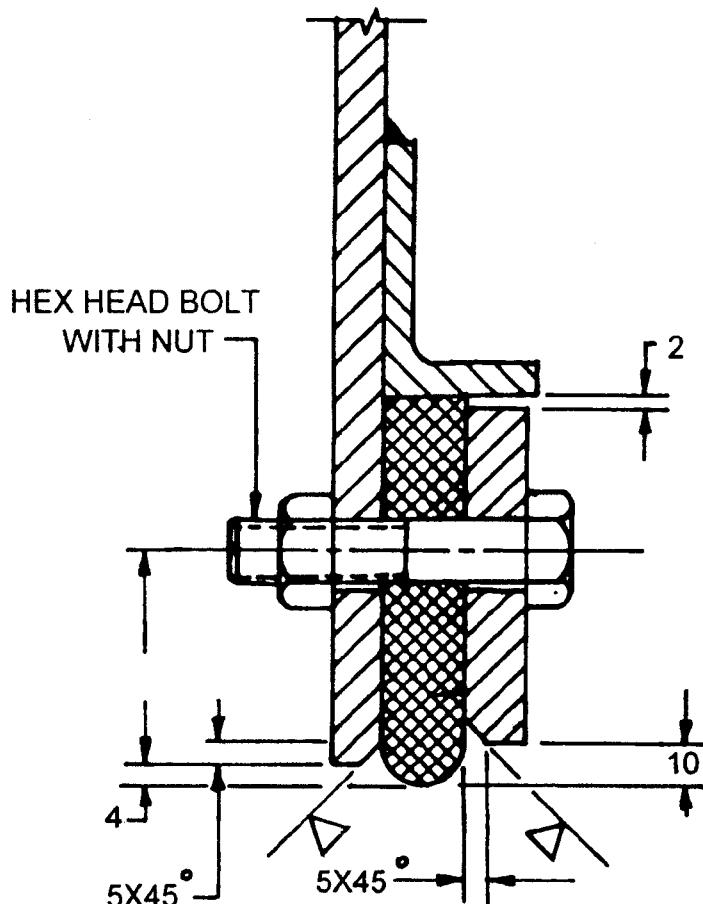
ASSEMBLY DETAILS WITH WEDGE TYPE SEAL
